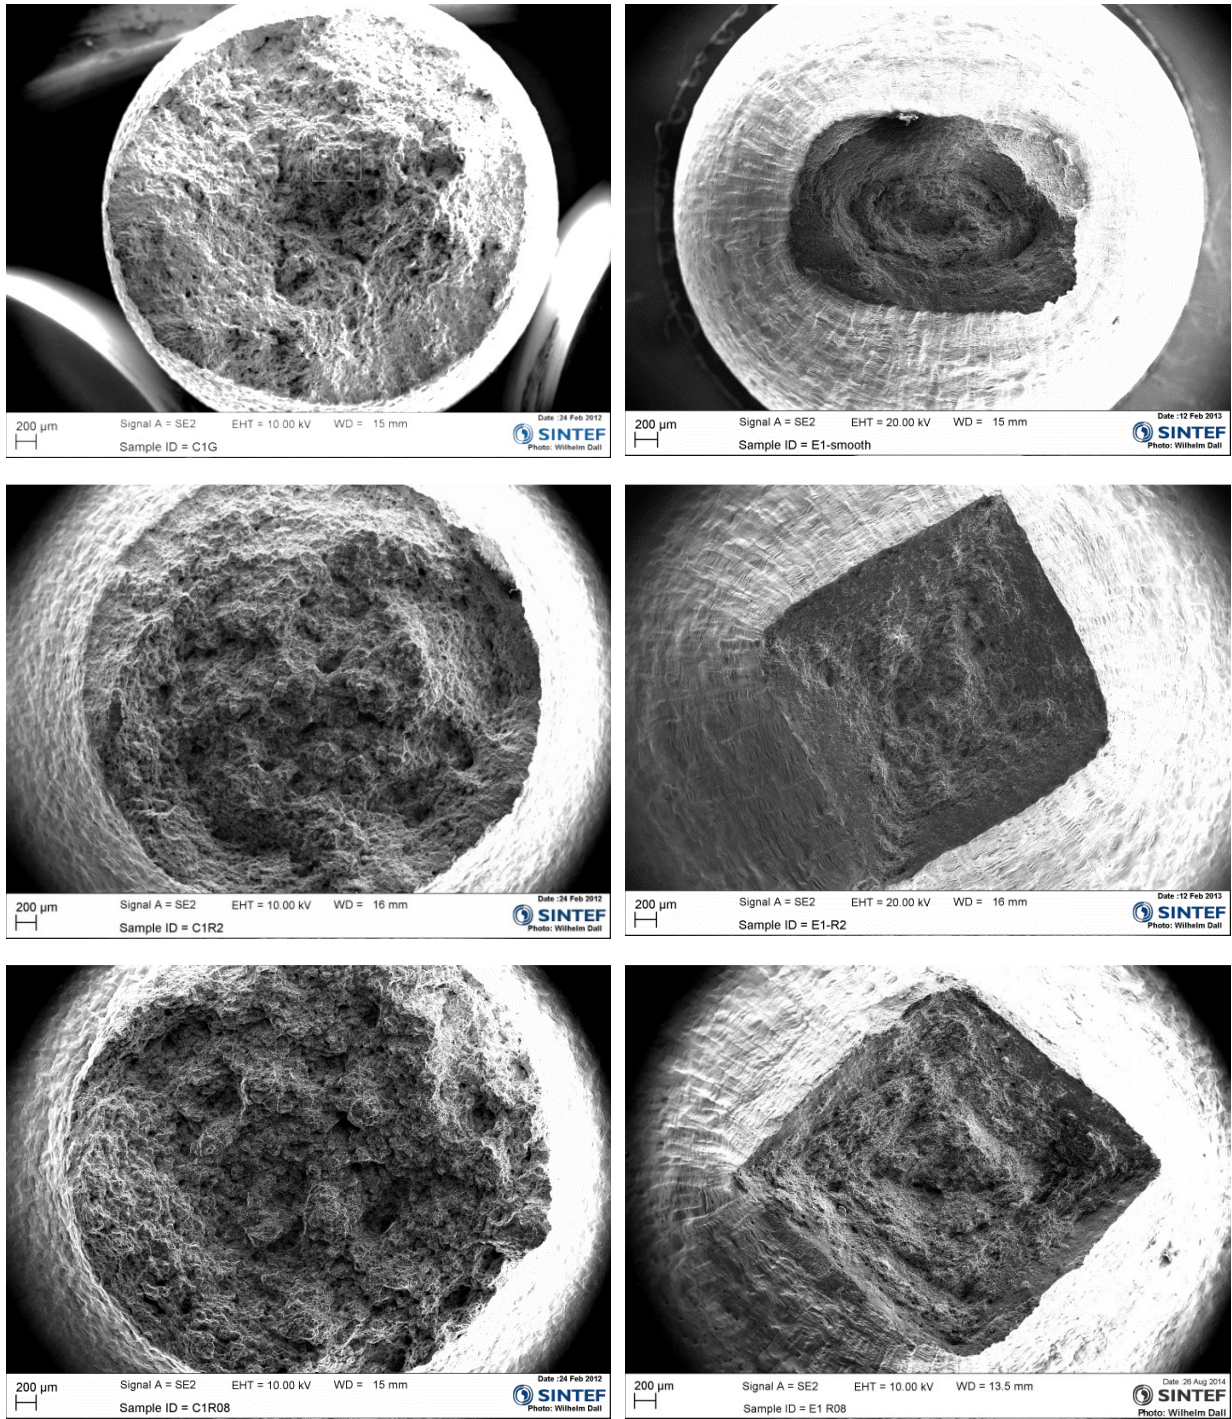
Geometry of fracture surface for the cast and homogenized material (left) and the extruded material (right): smooth specimens (top), 2 mm notch specimens (middle) and 0.8 mm notch specimens (bottom).
